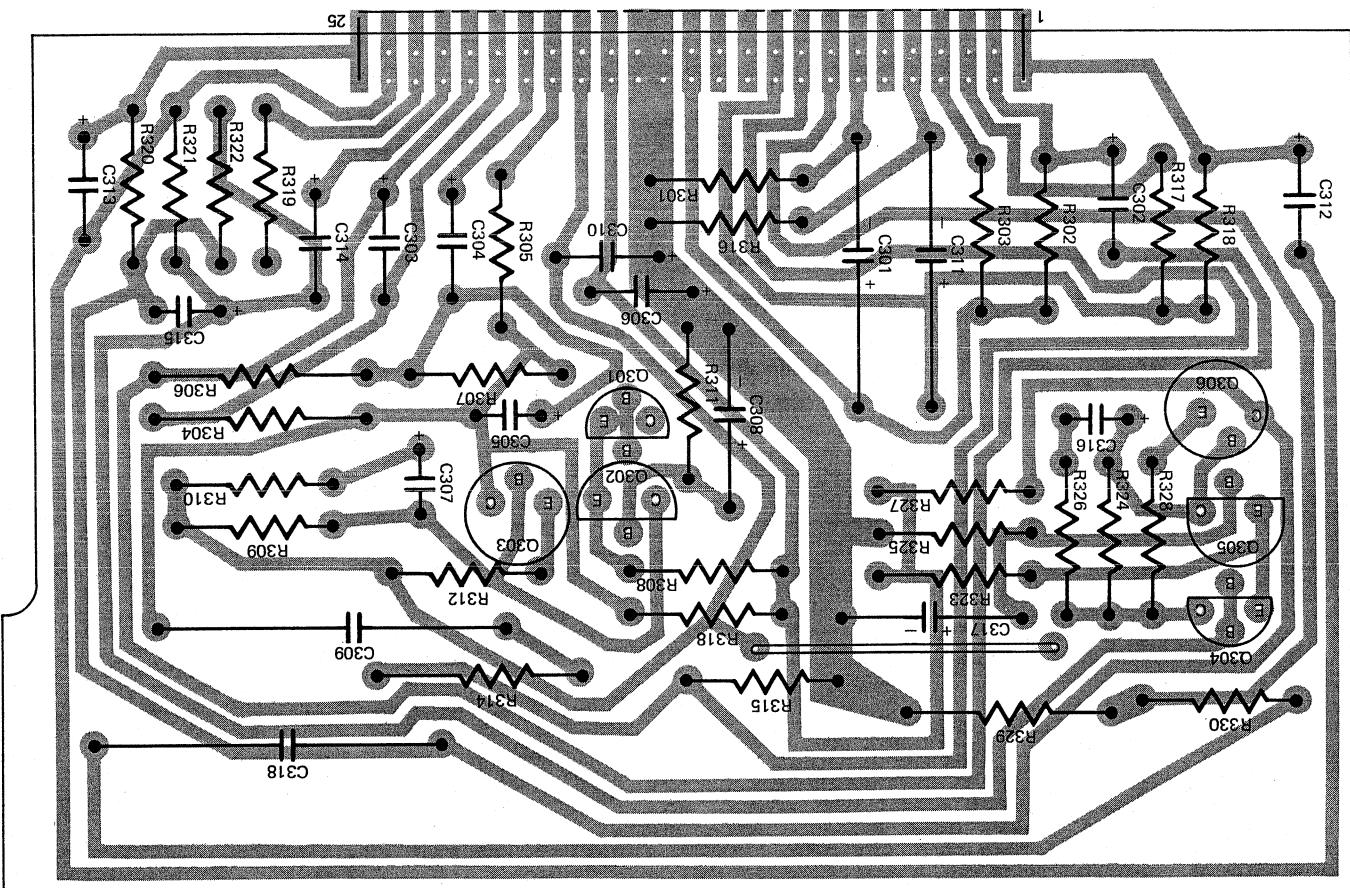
Power Amplifier Board – A5/A6 Component Assembly Diagram
